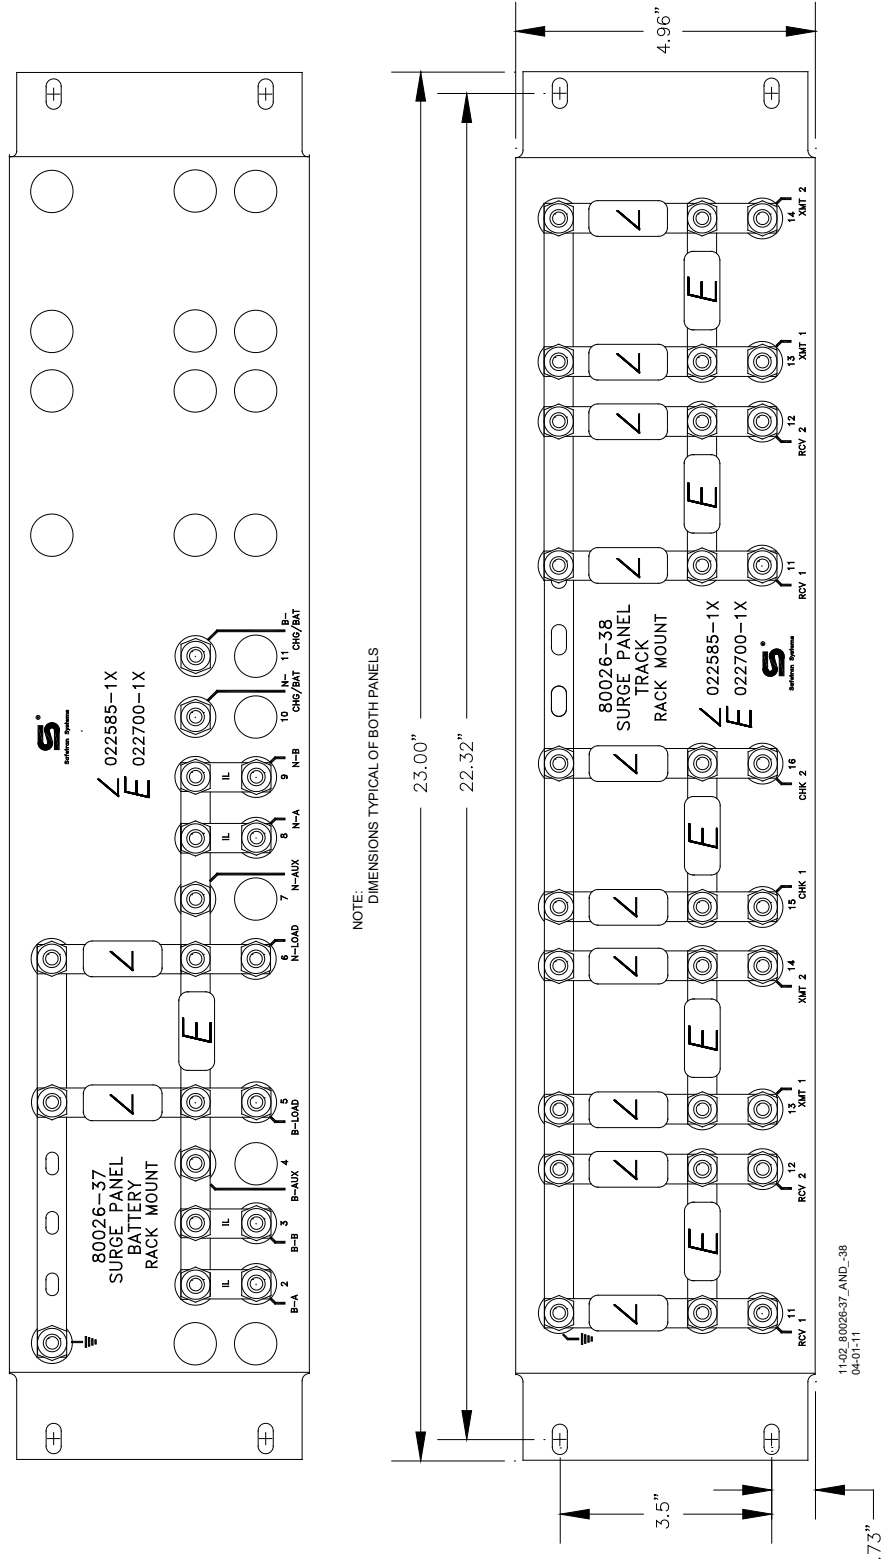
Rack Mounted Surge Panels, 80026-37 And -38
